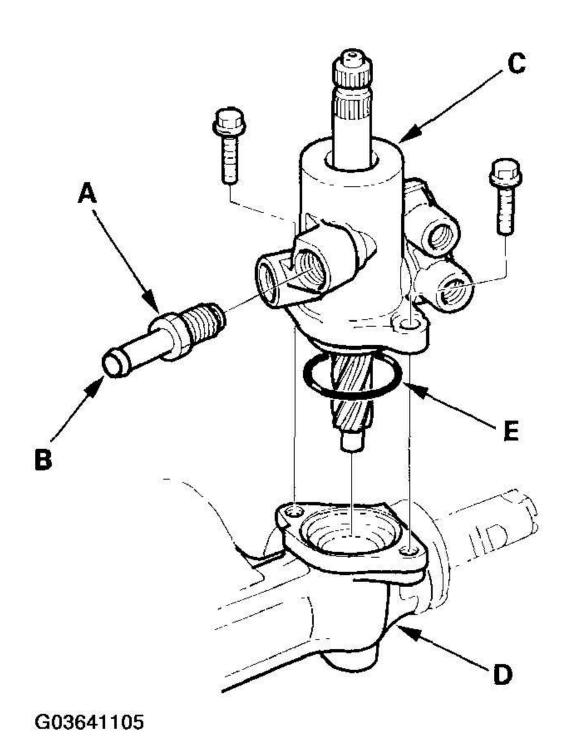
Removing Return Line Joint And Valve Body Unit Courtesy of AMERICAN HONDA MOTOR CO., INC.
